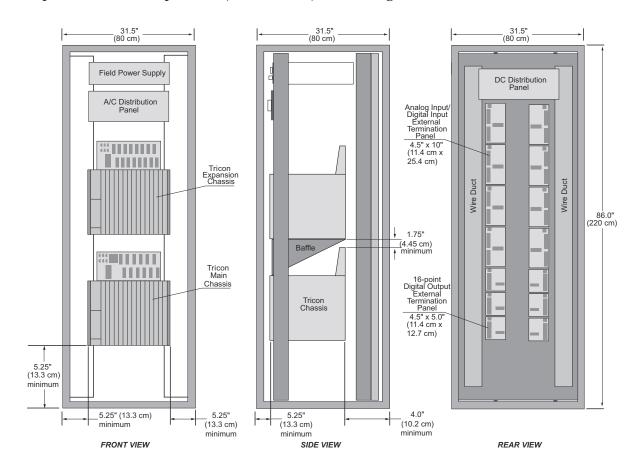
Typical Dimensions and Clearances for Chassis Installation with External Termination Panels
